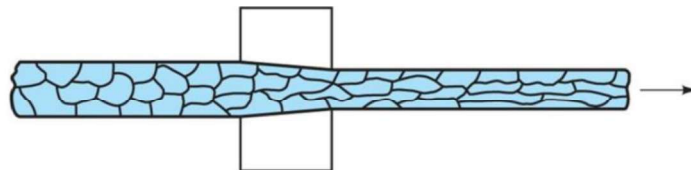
Stock wire material drawn through a die during a cold-drawing wire manufacturing process
